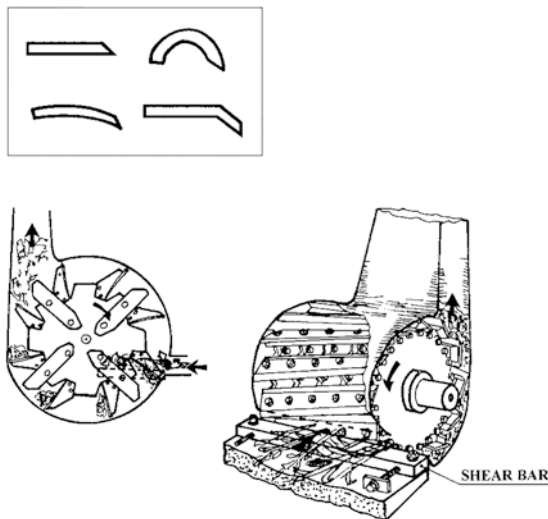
Flywheel (left) and cylinder (right) type cutterhead. Also shown are the main knife shapes (top) employed in the cylinder cutterheads. Adapted from [21]
